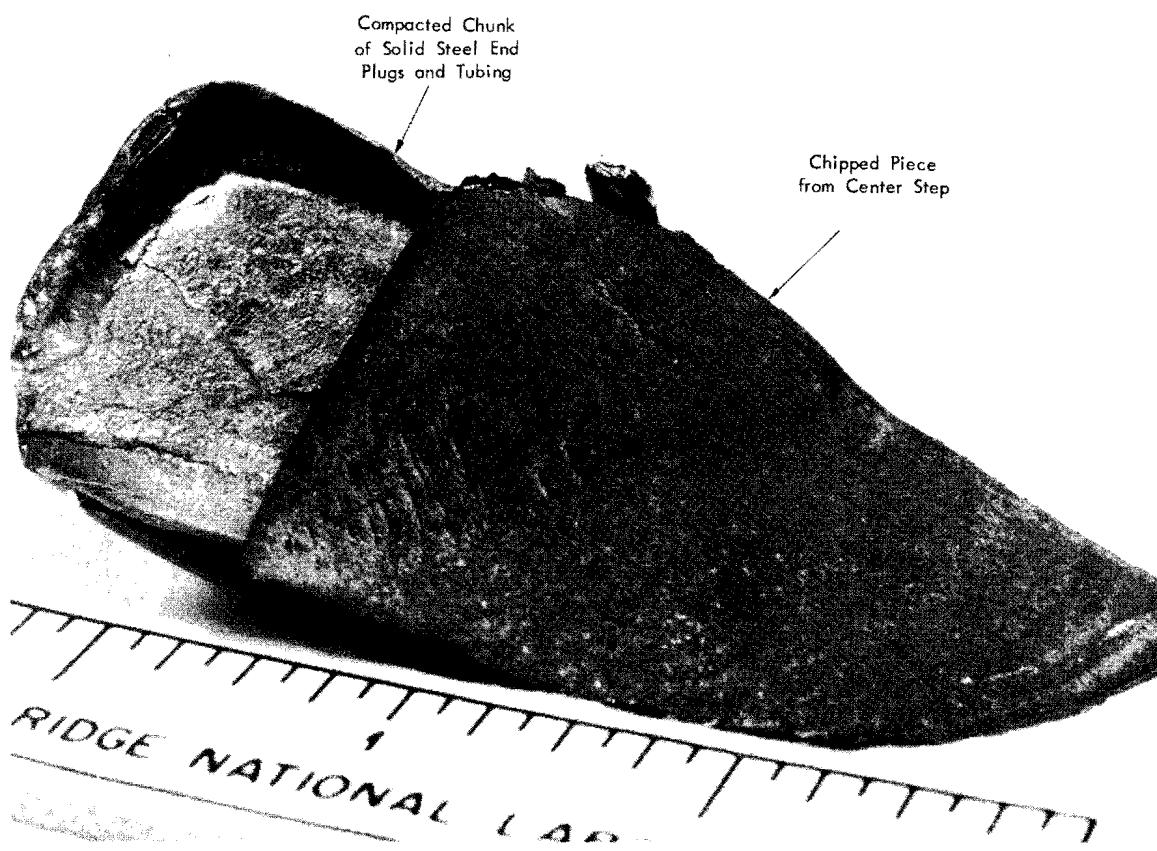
Chipped piece from center step of the Squarkeen No. 3 moving blade showing the compacted chunk of solid steel end plugs and tubing in which step of blade was nestled at the time of breakage.
